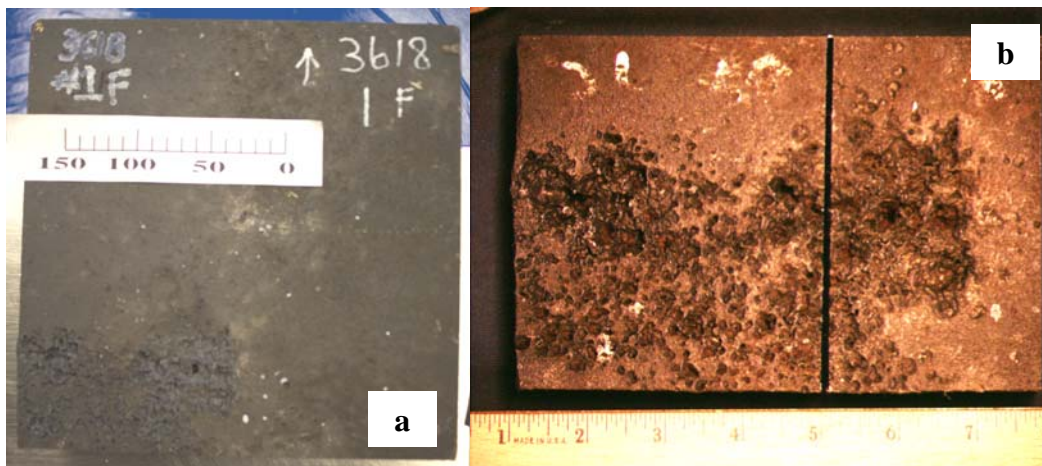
Macrophotograph of the impacted target plate in (a); enlarged view of the pitted surface in (b).
